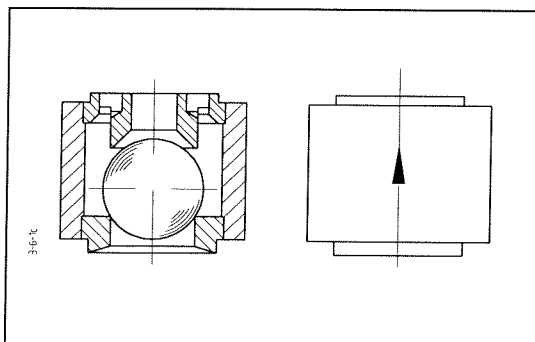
Single Ball Valve - Sectional and Plan View
